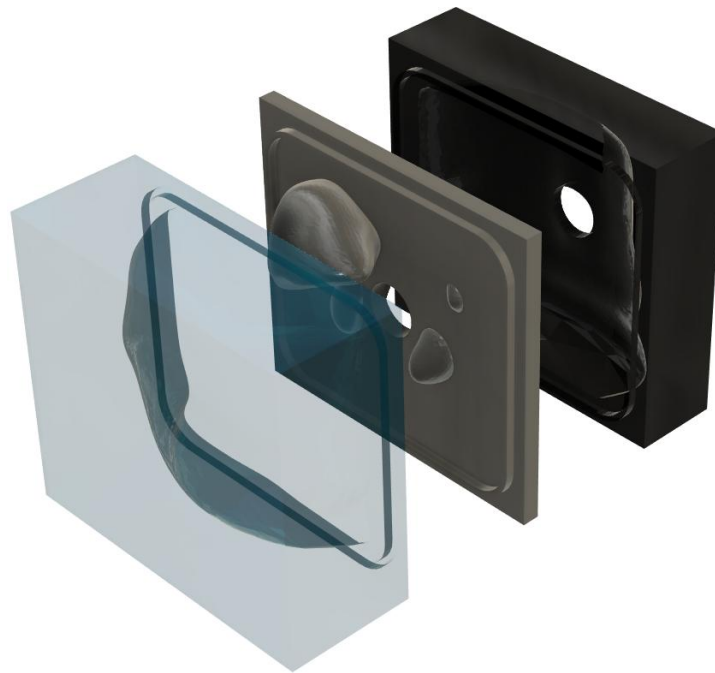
Exploded isometric view in Autodesk Fusion 360 depicting the anterior mold (blue) organ-positioning plate (grey) and posterior mold (black) assembly.
